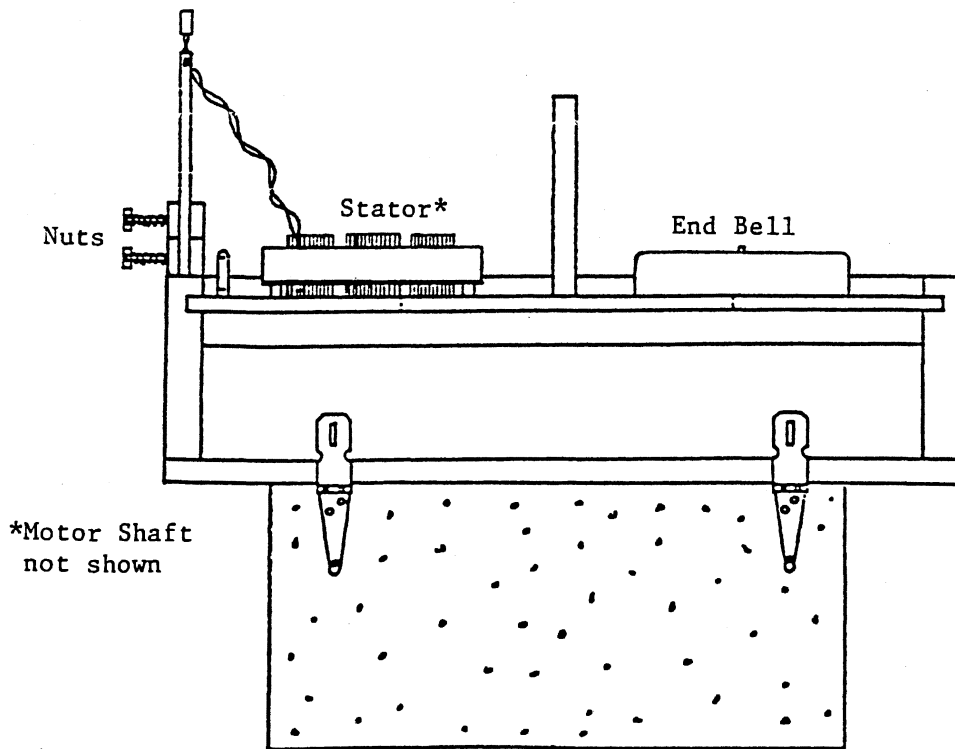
Assembly Fixture with Placement of Motor Components (Top View)
